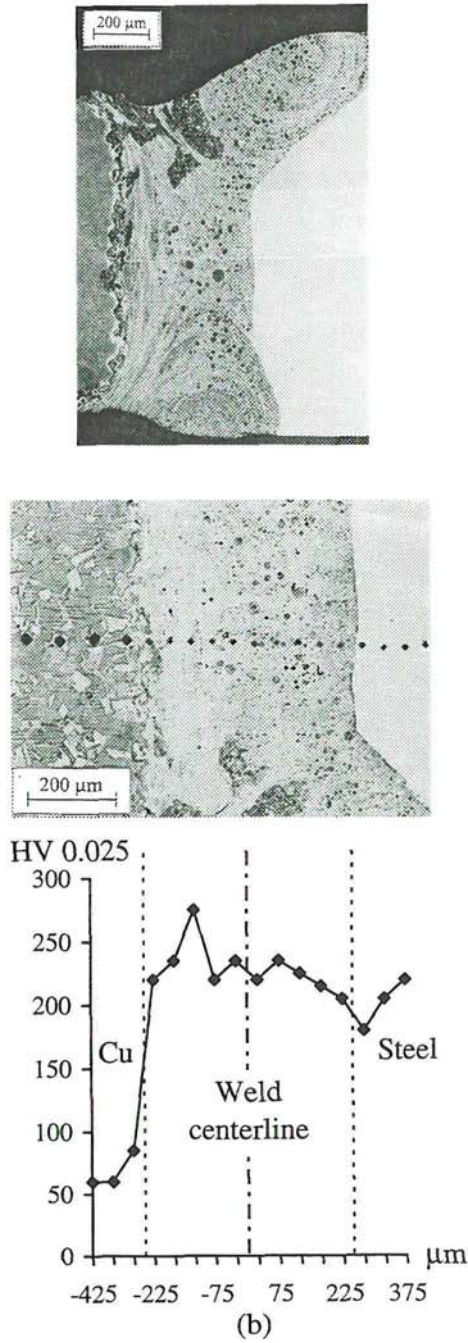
(b). Weld cross sections and hardness profile using nitrogen as shielding gas.
